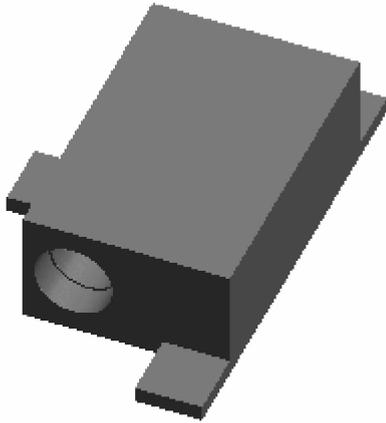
A workpiece requested to design a fixture (Maximum size is 80 mm × 49 mm × 22 mm)
